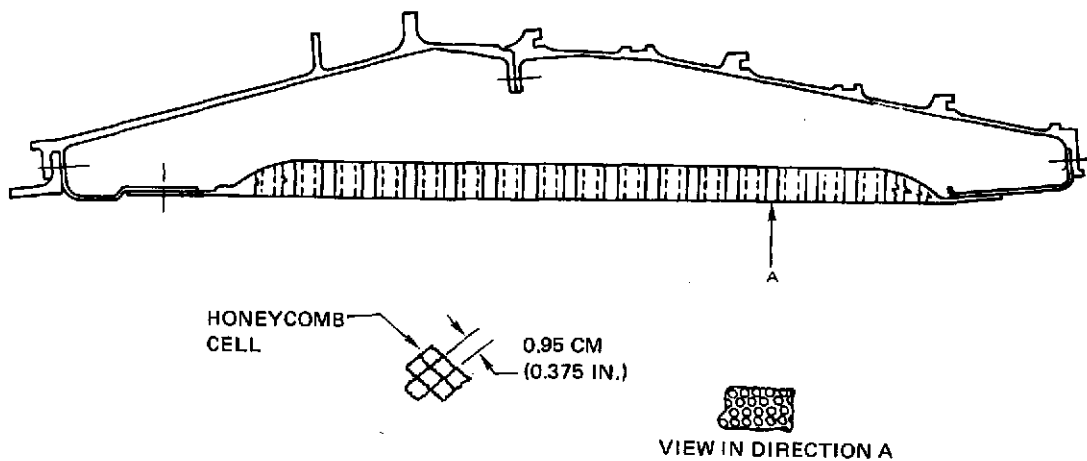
JT8D-100 Turbine Case Acoustic Fairing
